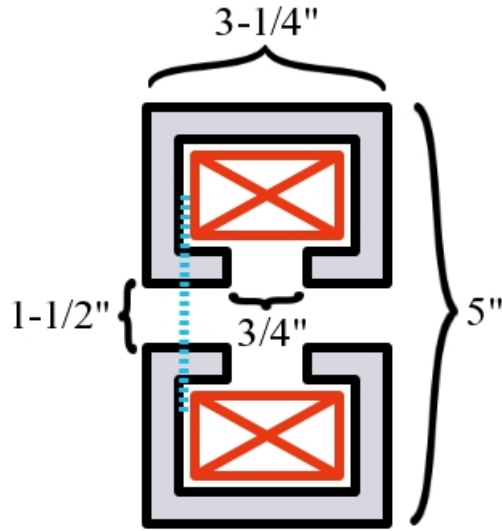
Cross-sectional profile of alternate magnet polepieces with magnet iron in gray and position of current carrying coils marked with red. The blue dotted line shows where the polepiece was cut to create the hybrid polepieces.
